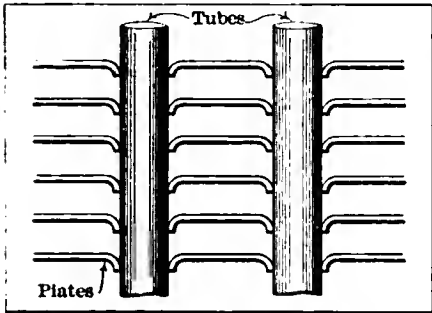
Section showing how the gill-plates are flanged over tubes to increase surface of contact with tubes
